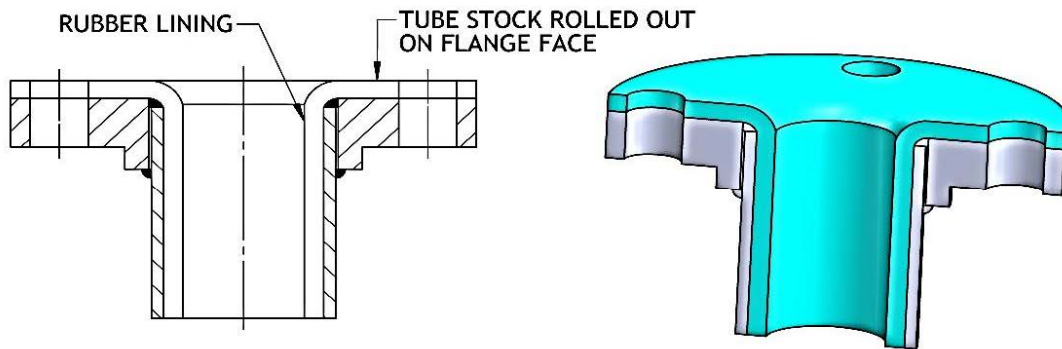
Rubber lining to maintain thickness over the flange face (Tube stock rolled out on flange face)
